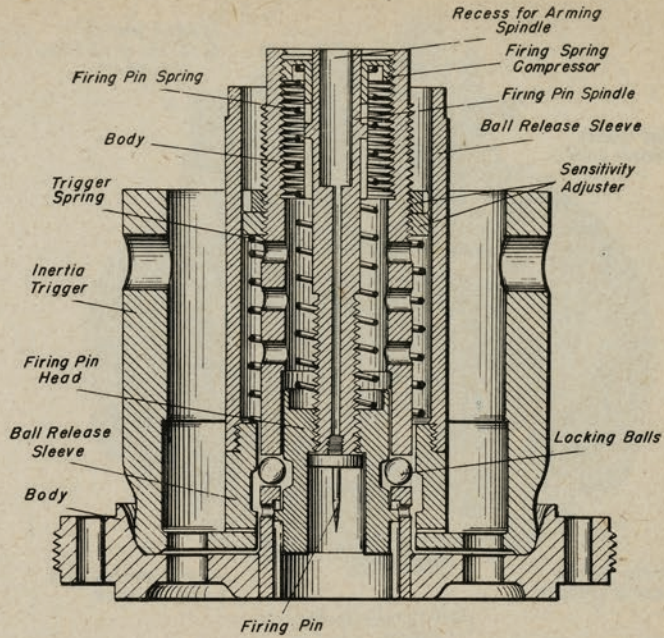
Exploder Type 2 Firing Assembly, Sectional View
